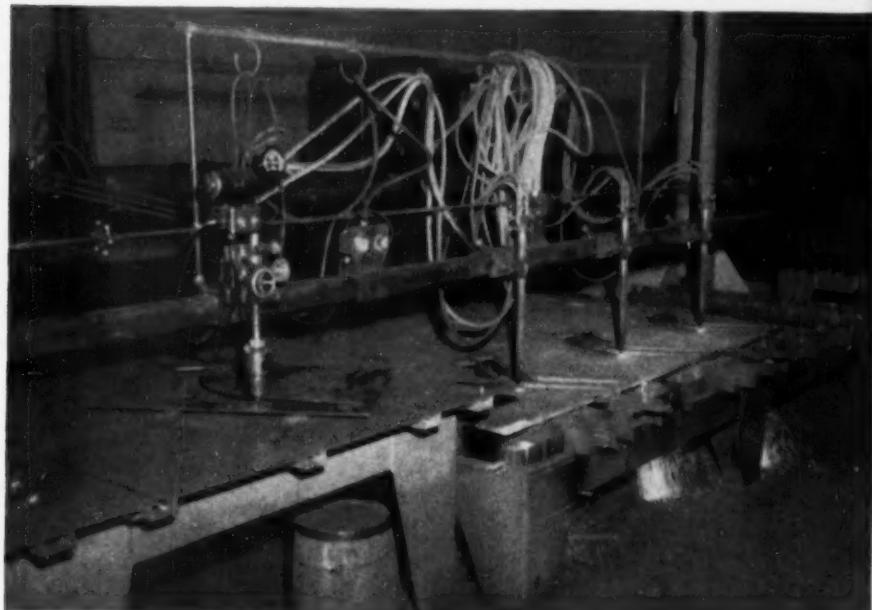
General arrangement of one of the larger types of flame cutting machines. The tracing table is located at the left and the cutting table at the right. Note magnetic tracer within the female templet, while three torches are cutting identical outlines.
